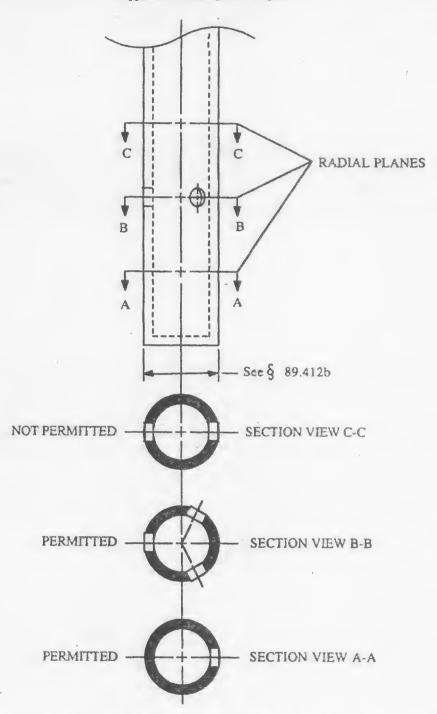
SAMPLE PROBE AND TYPICAL HOLE SPACING
